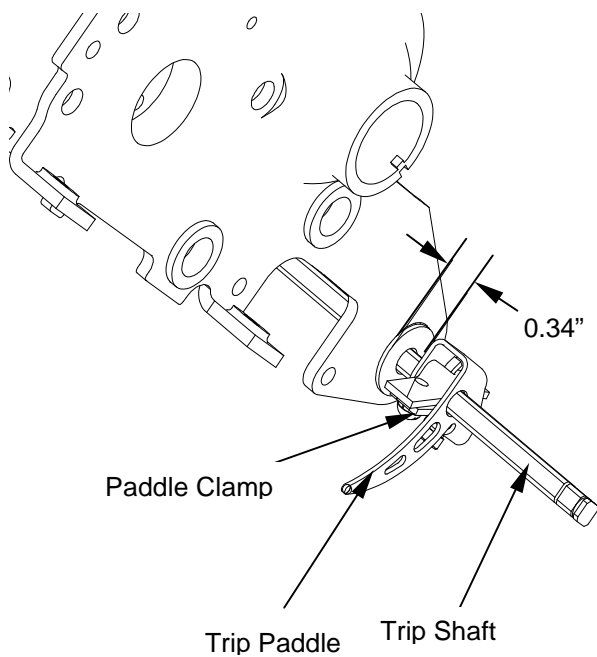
Mounting the trip paddle assembly on the trip shaft.
